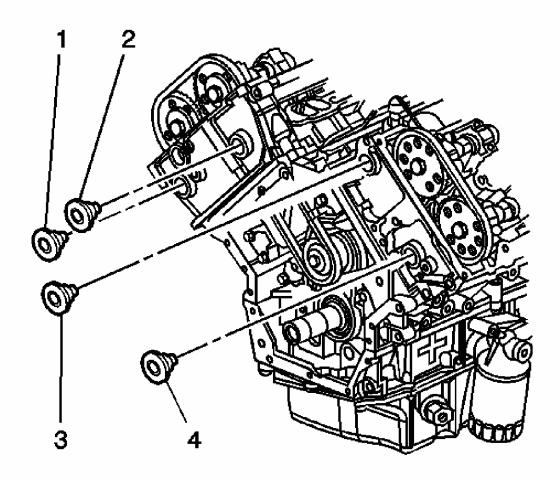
Locating Camshaft Drive Chain Shoe Access Plugs On Front Of Engine Courtesy of GENERAL MOTORS CORP.
